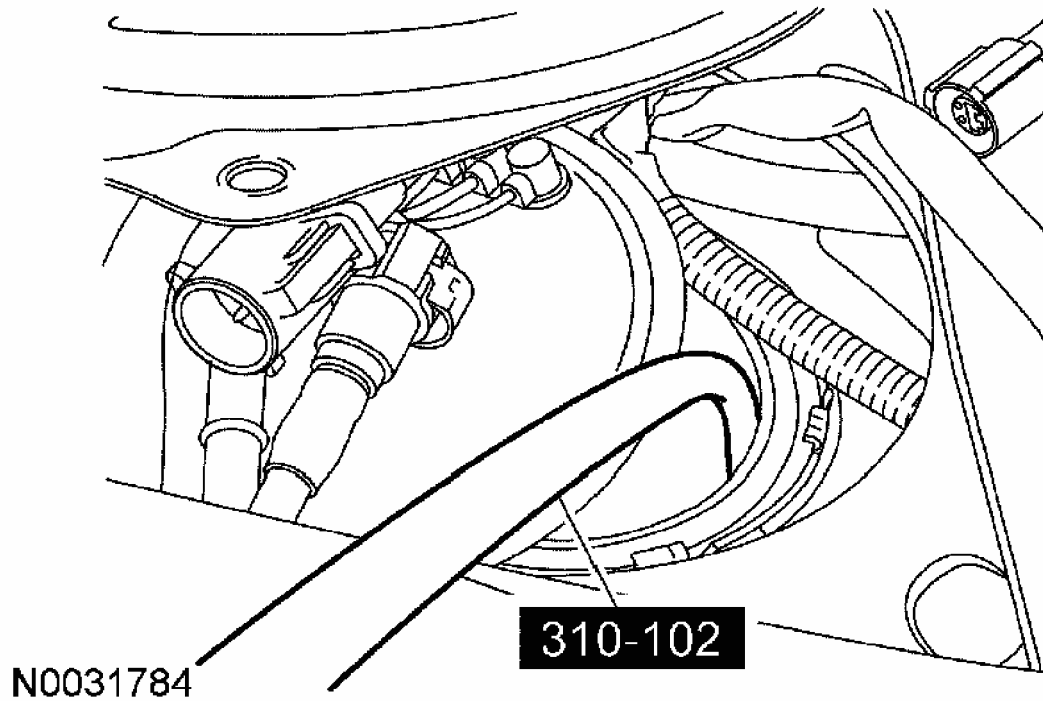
Rotating Lock Ring Counterclockwise
